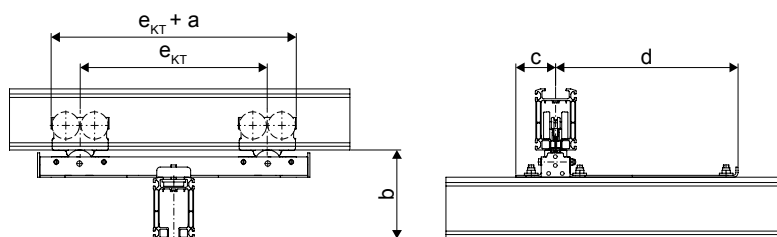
A18/A22/A28 single girder crane end carriage, A18/A22/A28 track section
